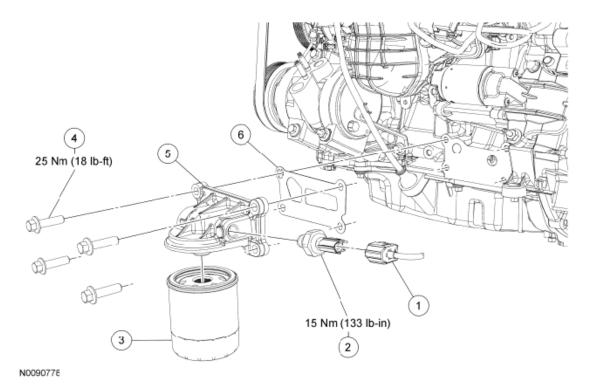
Identifying Oil Filter, Oil Filter Adapter And Engine Oil Pressure Switch With Torque Specifications
